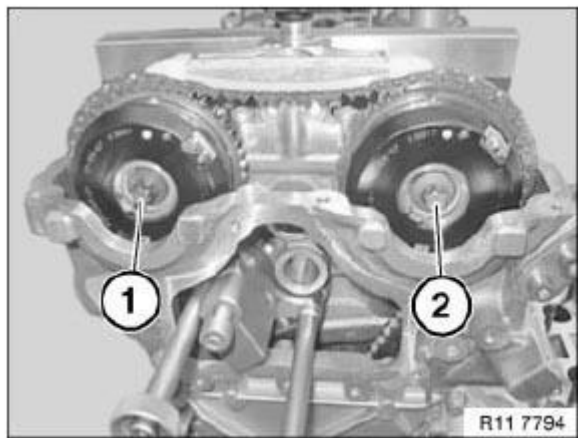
Identifying Inlet And Exhaust Camshaft Central Bolts
